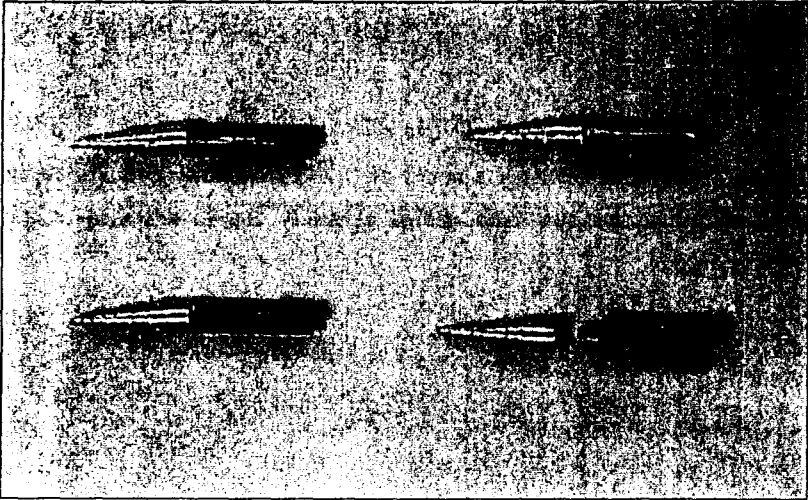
Photography of the fabricated micro-machine; dimension of permanent magnet is 1 mm diameter and 10 mm lengthf.
